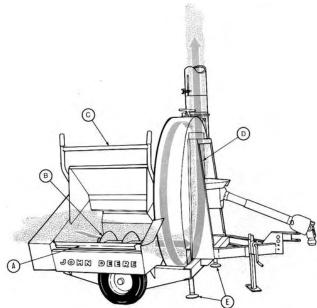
John Deere 6500: (A) Shaker Pan, (B) Transfer Auger, (C) Clutch Lever, (D) Blower Fan, (E) Stabilizers.
